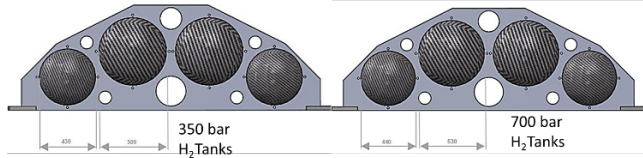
Available sections on benchmark train roof and chosen tank layout for 350 and 700 bar storage pressure
